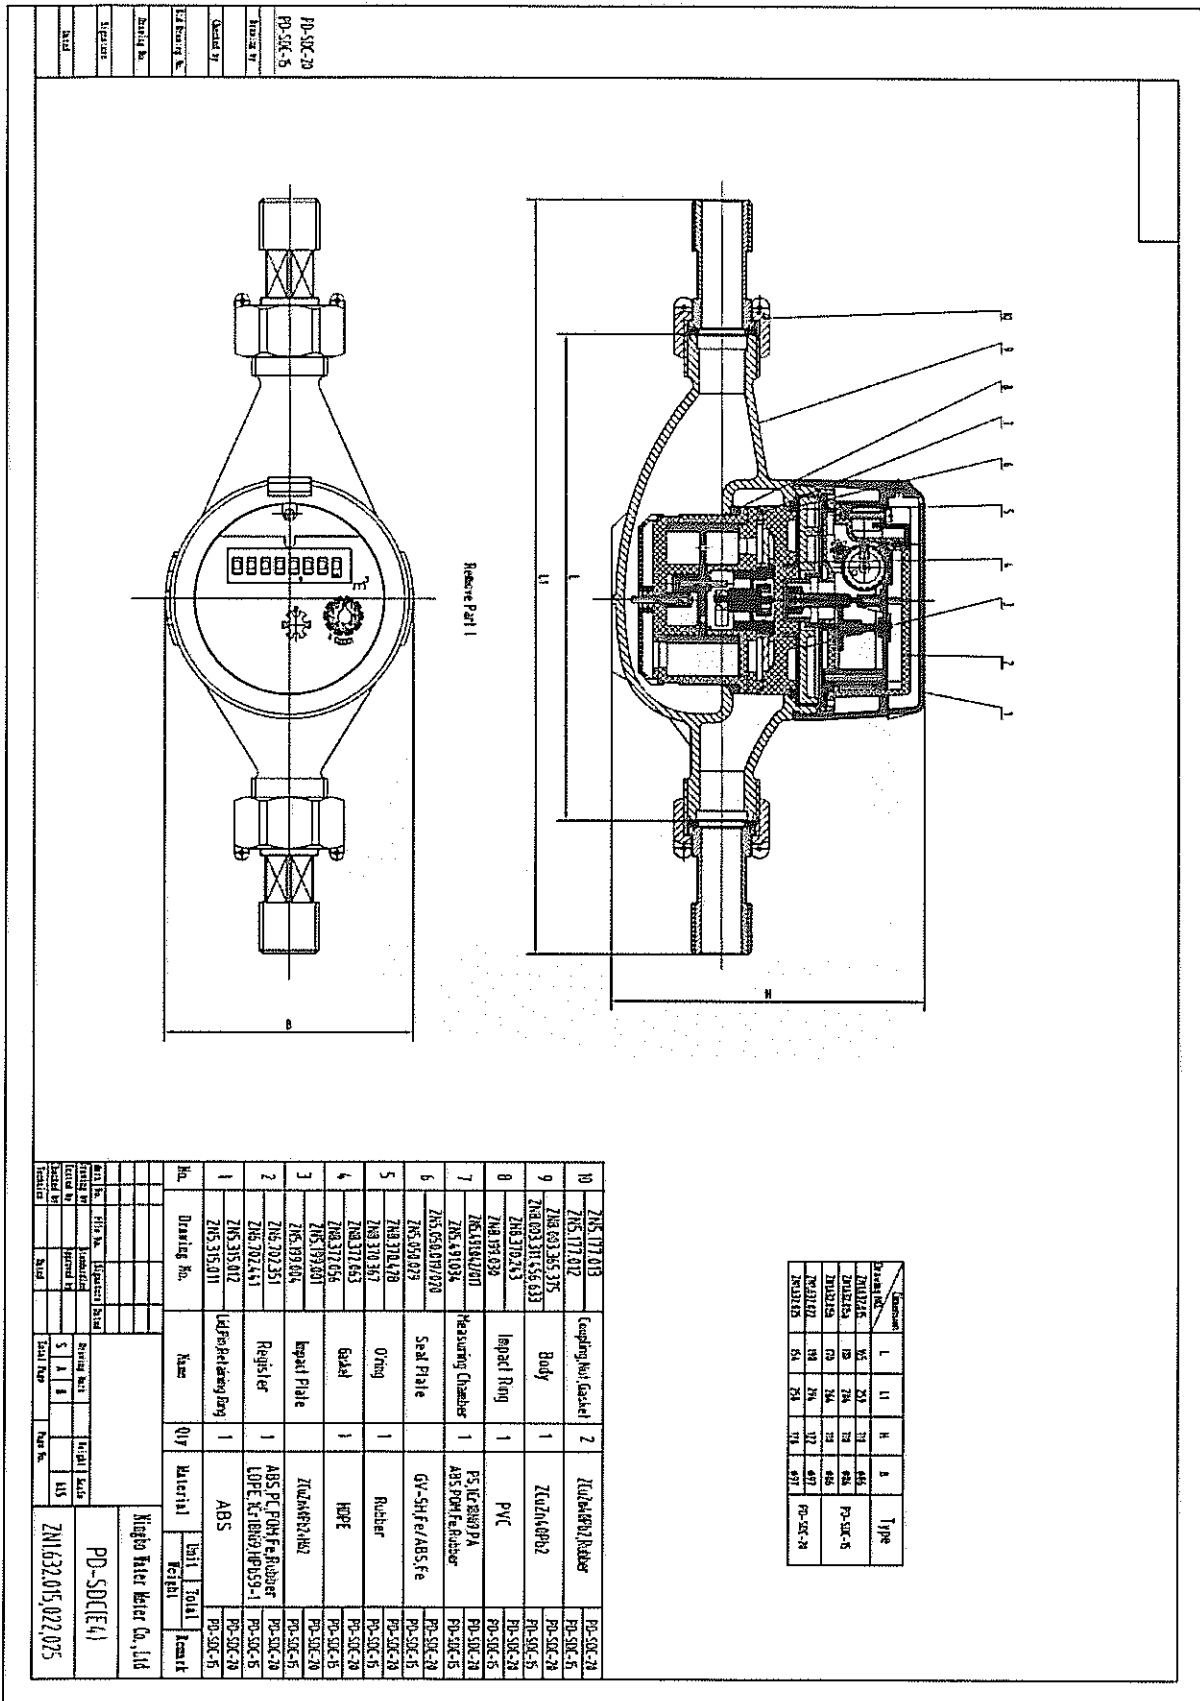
The water meter type PD-SDC (E6) assembly drawings:
